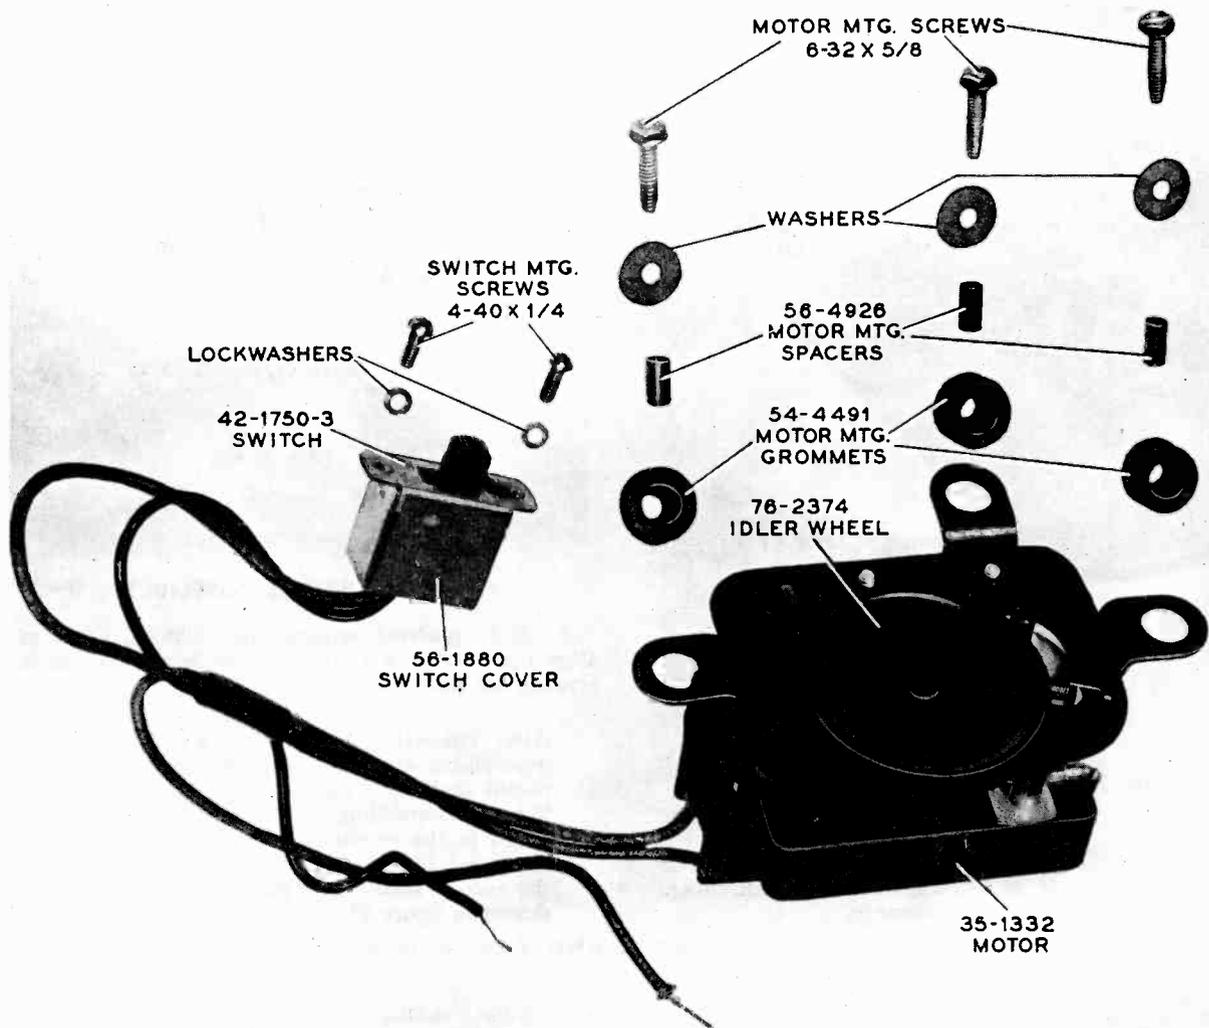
MOTOR, SWITCH, AND MOUNTING HARDWARE
